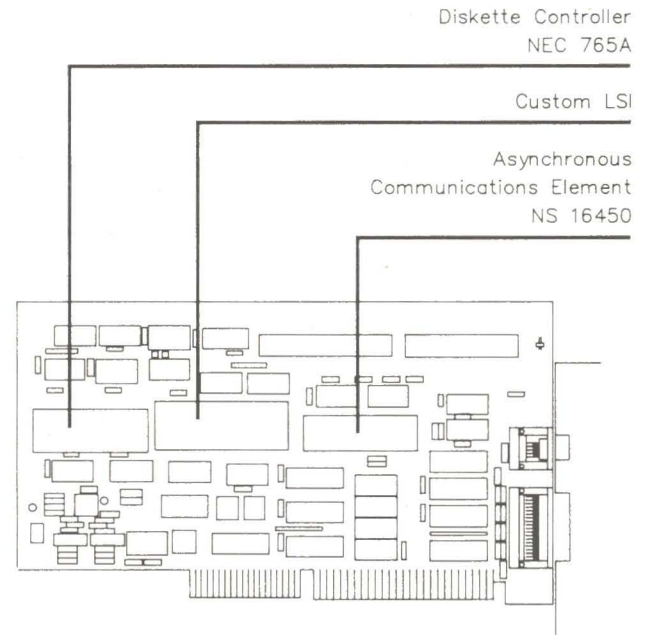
Multipurpose Fixed Disk Controller Board Component Layout
